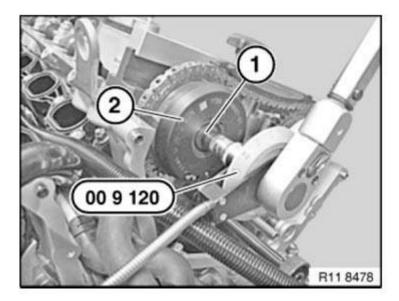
Securing Intake Adjustment Unit Central Bolt Using Special Tool 00 9 120 Courtesy of BMW OF NORTH AMERICA, INC.
